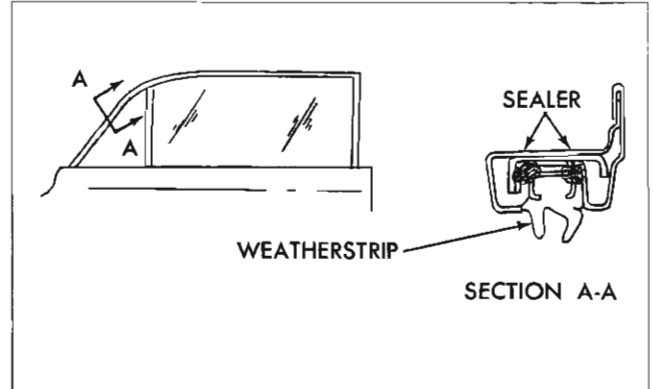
Ventilator to Door Upper Frame Sealing
